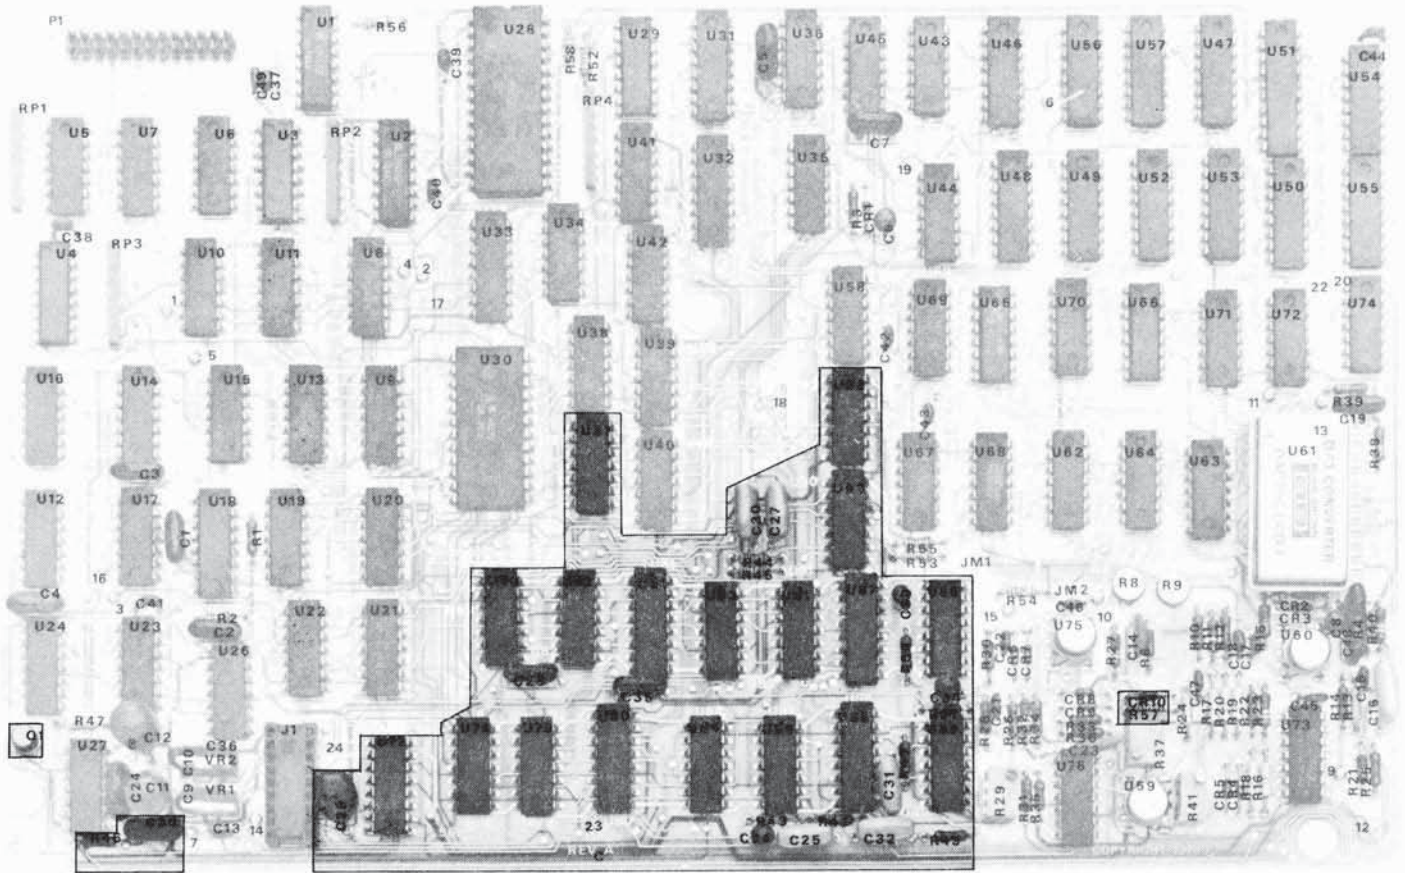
GPIB Interface (A6) PCB Byte Sequencer Circuit Parts Locator Diagram
